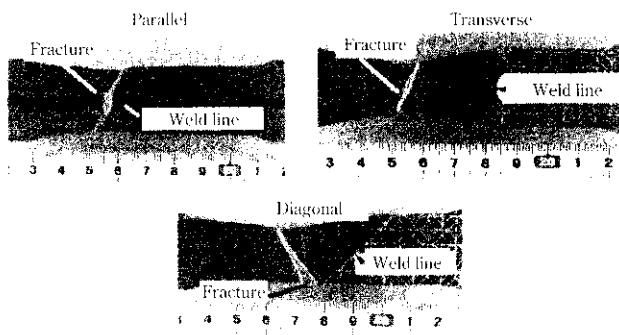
Fracture behaviors of tailored welded blank depending on the tensile testing direction to weld line¹⁷
